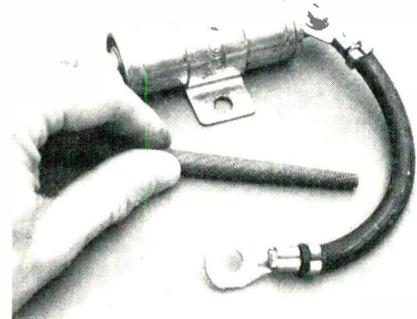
A round file or tapered reamer should be used to enlarge the mounting hole or terminal hole, as needed.
